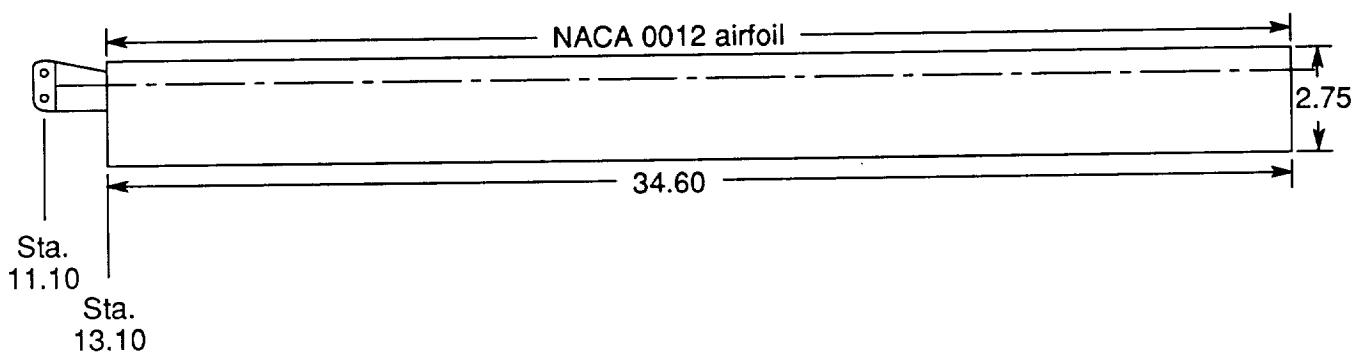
Geometry of -100 and -200 model rotor blades. All dimensions are in inches.
